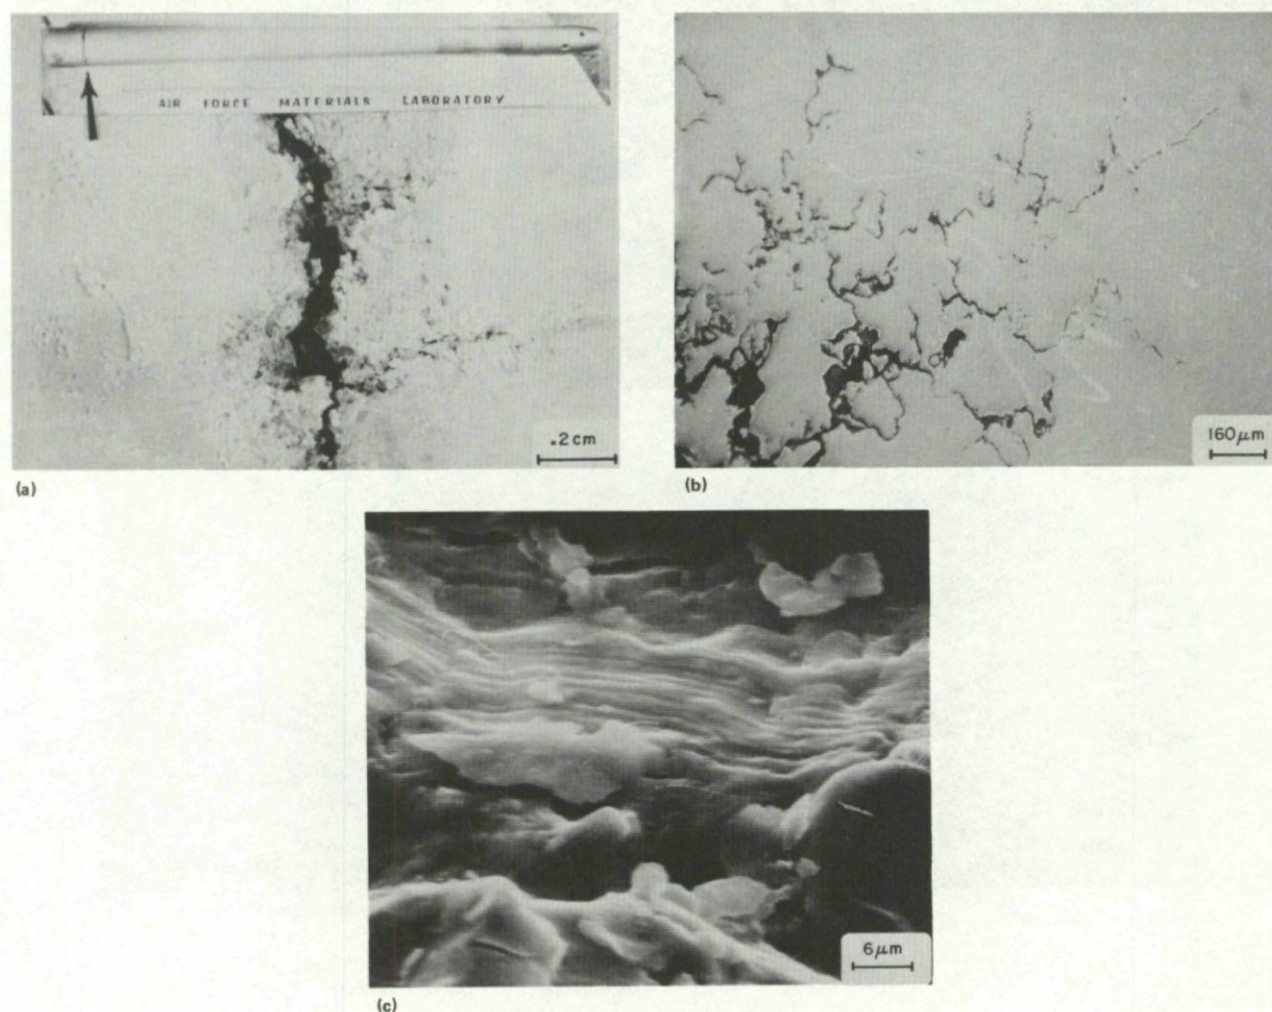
Corrosion fatigue in a 6061 aluminium pitot support tube
